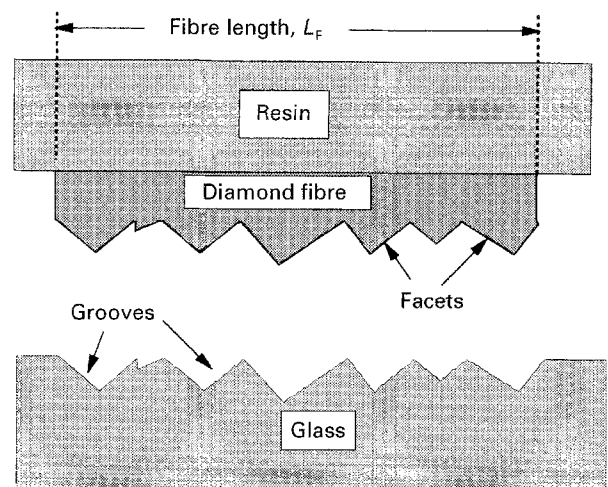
Schematic drawing of a vertical section, normal to the grinding direction and through a resin-mounted diamond fibre and glass surface, showing the shape of grooves made by facets.
